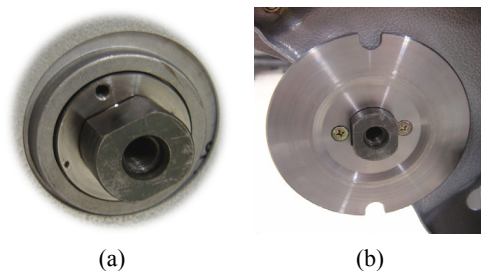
The spindle for modification : (a) The modified spindle 1, (b) The modified spindle 2
